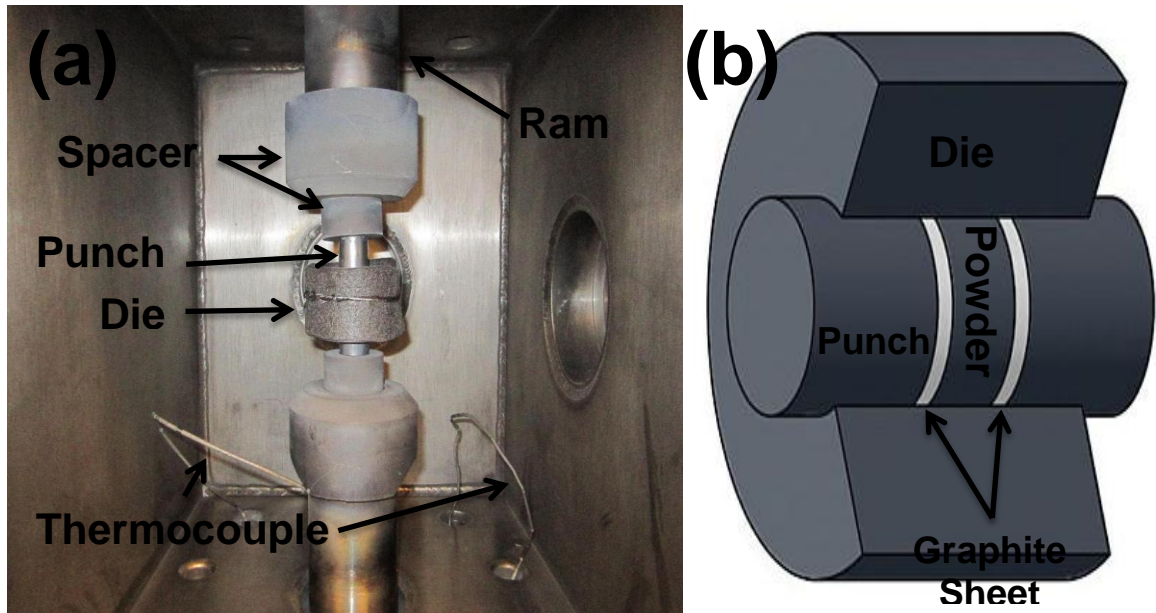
(a) Die-Punch assembly inside the heating chamber (b) X-section of Die-punch assembly.
